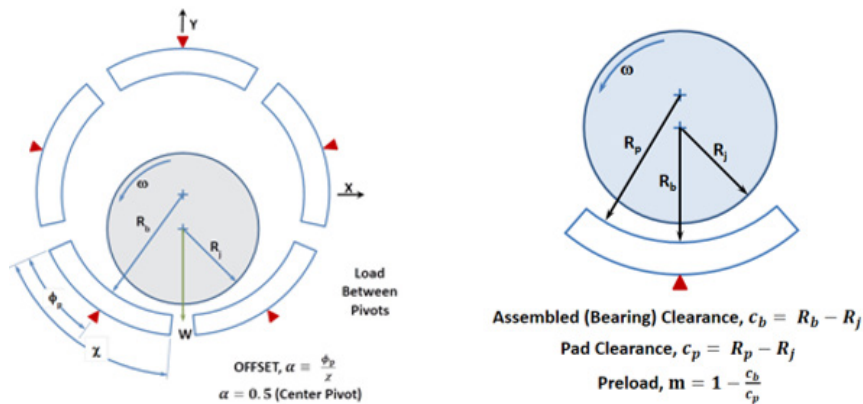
Geometry Definitions for Tilt Pad Bearing
